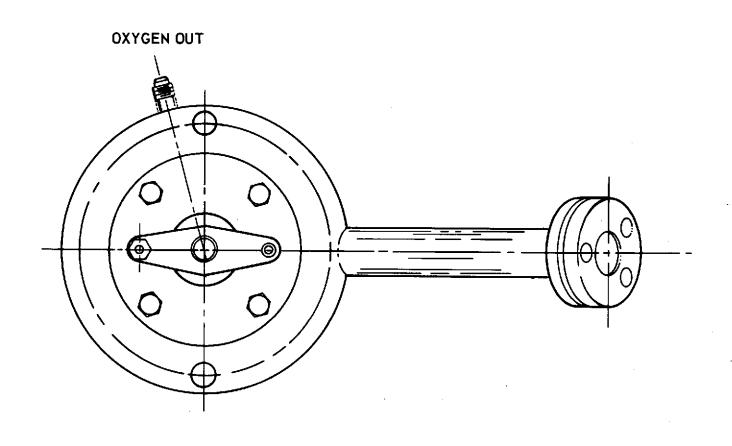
GOX IMPACT TESTER, TOP VIEW
